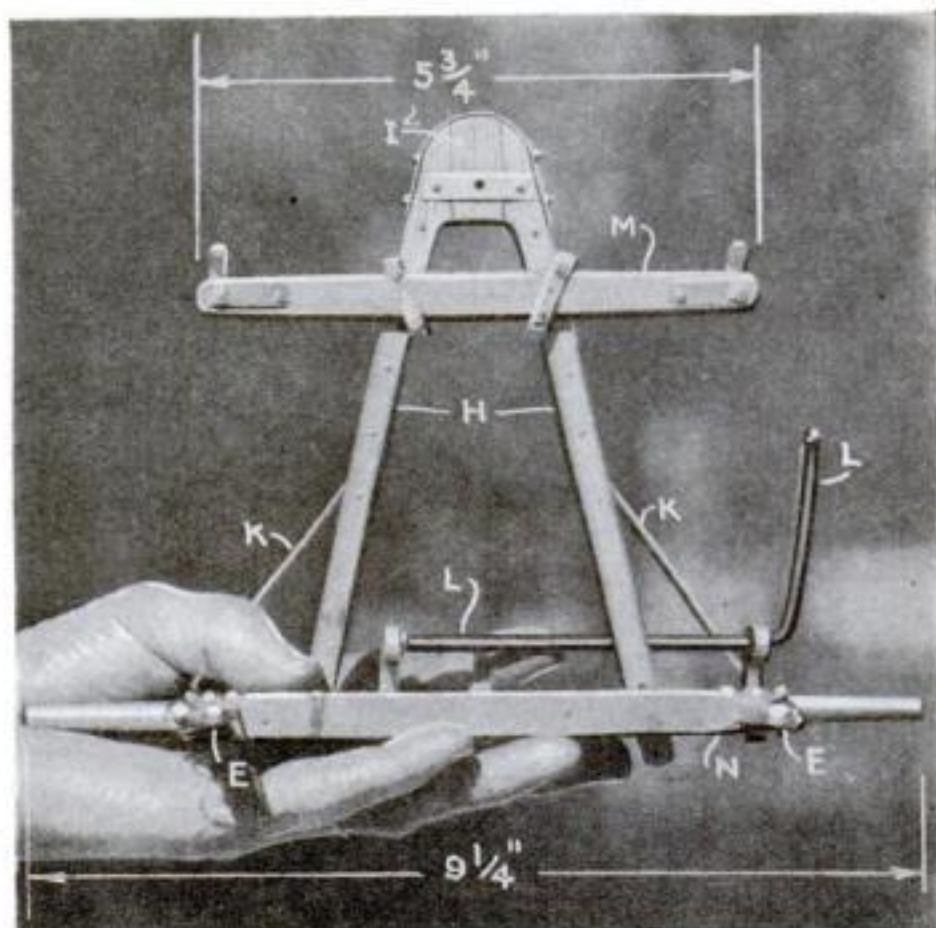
Top view of the same assembly shown in Fig. 4. The rear bolster and stakes *E* show, but all except the spindles on the axle *N* are hidden.
